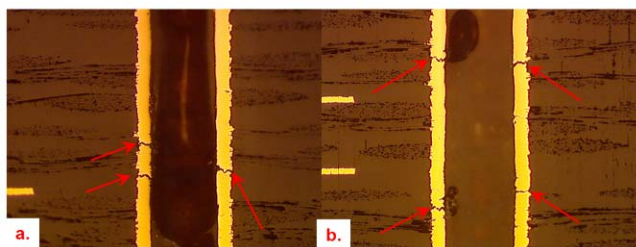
BGA failures after -55 to 125°C ATC failures in board material by via plating crack in boards built with Sunrise and b) boards built with Sunflower
